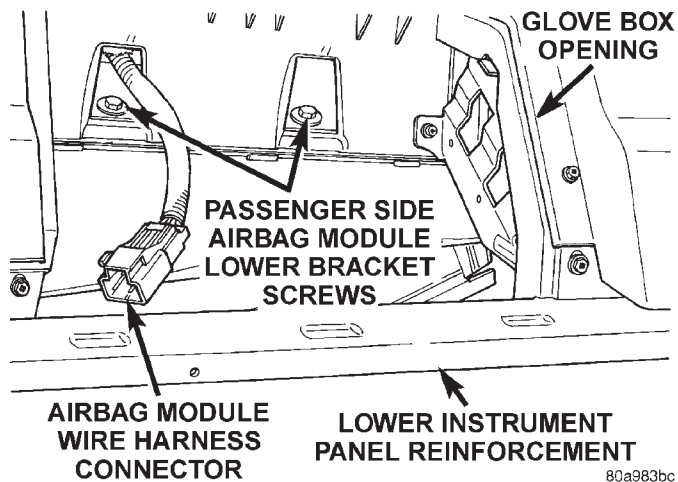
Passenger Side Airbag Module Lower Bracket Screws
